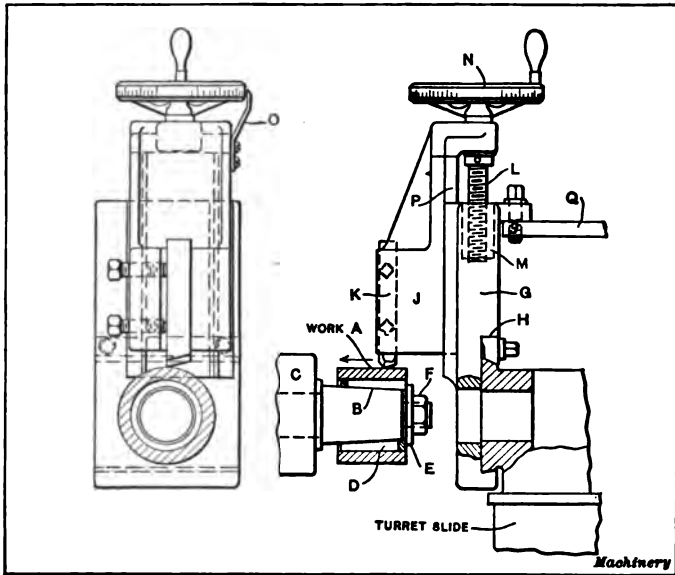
Adjustable Turning Tool for Finishing the Outside of Short Bushings
